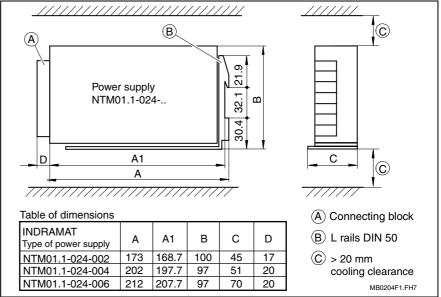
Dimensional sheet DC24V – NTM power supplies
